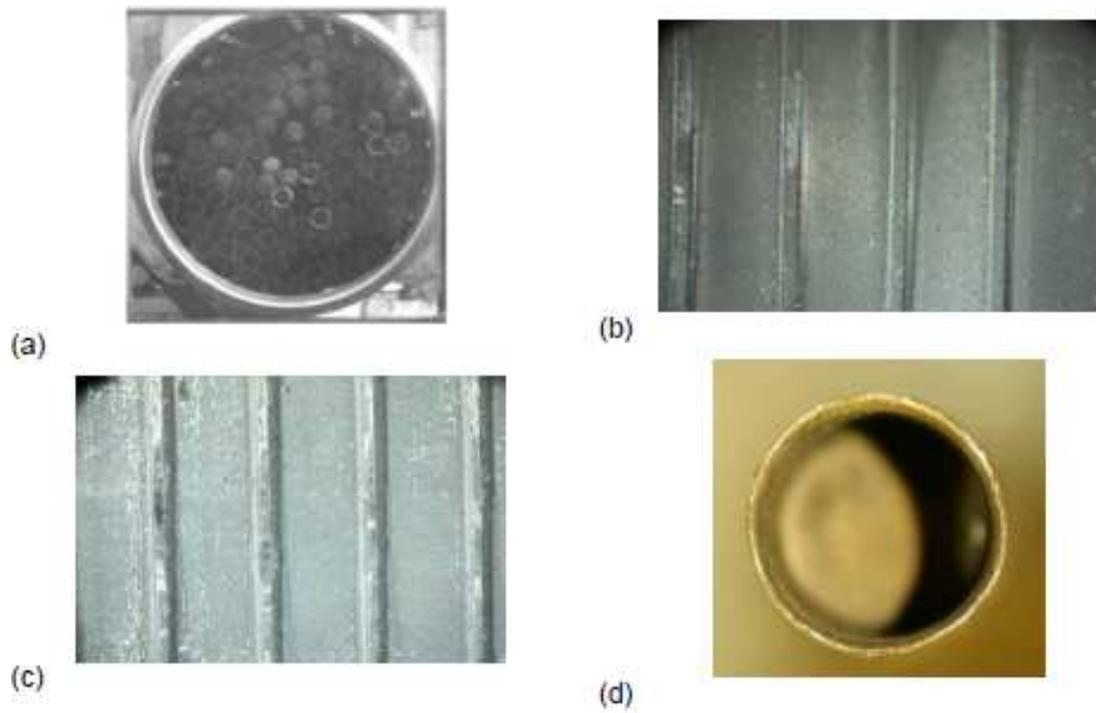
Visual inspection and photography of long stored pins showing (a) receipt inspection in slotted can (b) general cladding condition (c) minor handling damage on clad surface (d) end cap condition
